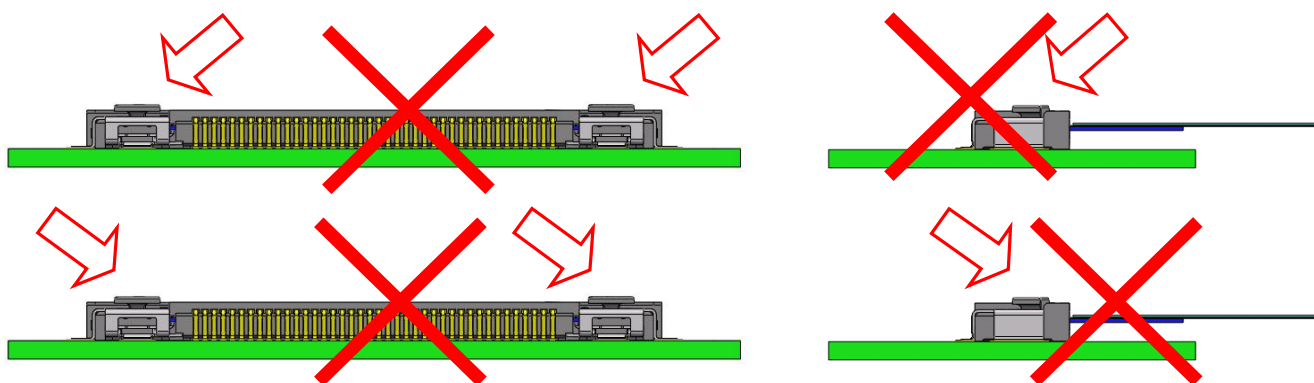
FFC/FPC withdrawing - Bad example 1
